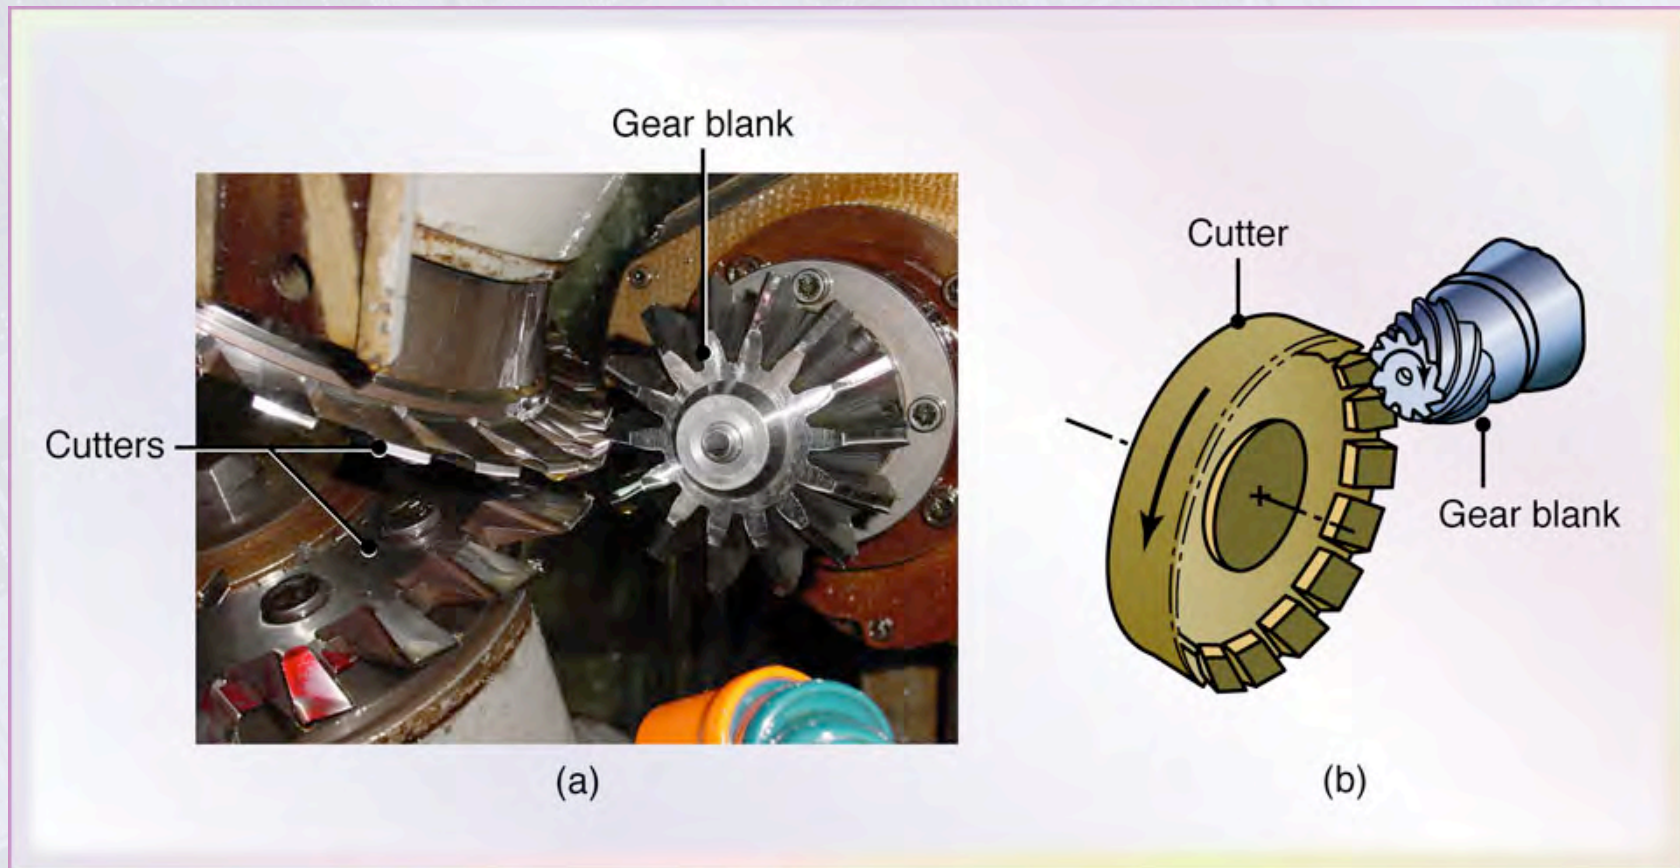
(a) Cutting a straight bevel-gear blank with two cutter. (b) Cutting a helical bevel gear. *Source:* Courtesy of Schafer Gear Works, Inc.
